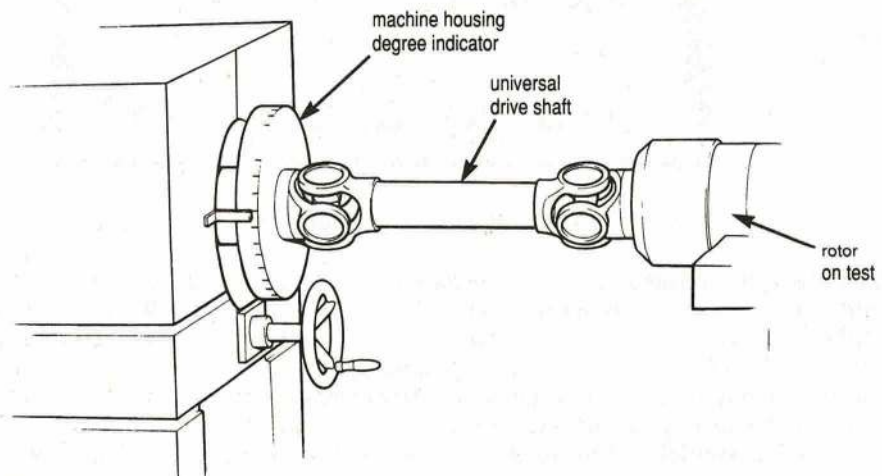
Machine housing degree indicator and universal drive shaft
